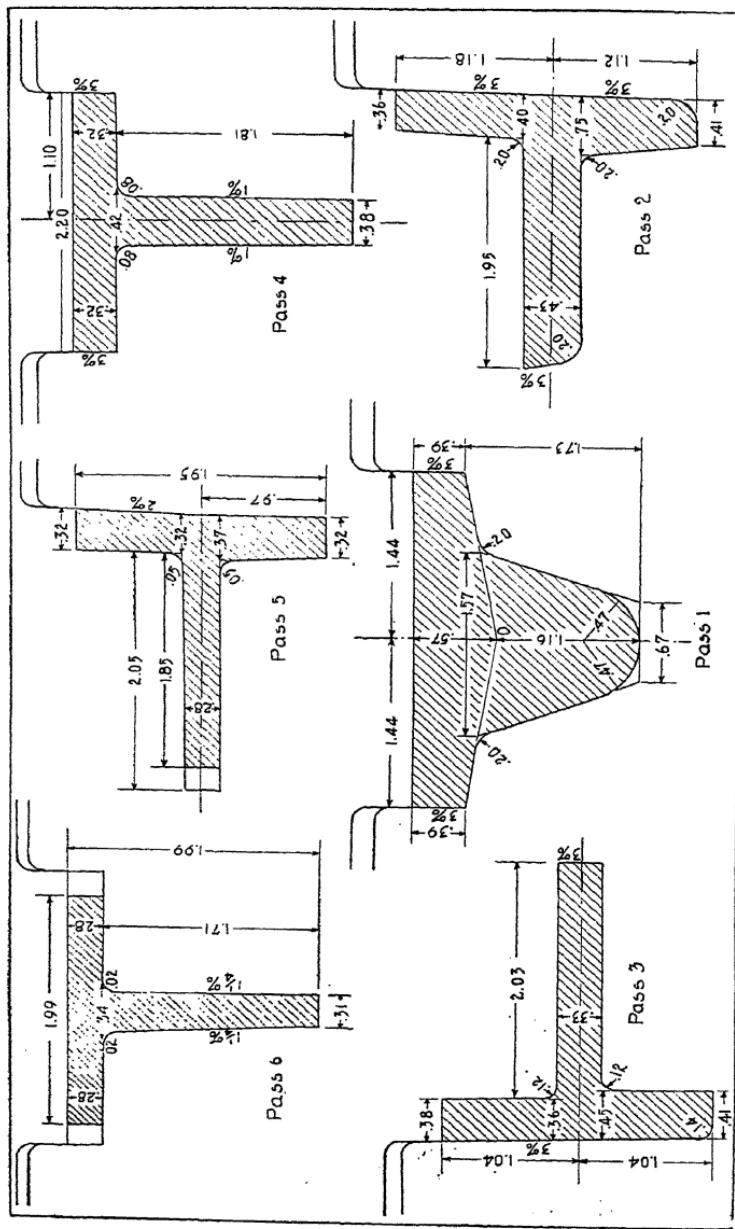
Pass Layout of a Tee Using the Various Dimensions Tabulated in Table IX
